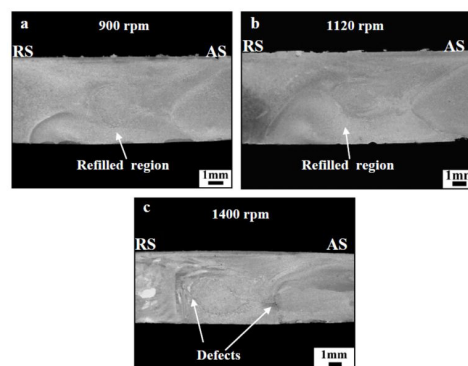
Macro structures of Welded samples (a) 900 rpm; (b) 1200 rpm; (c) 1400 rpm.
